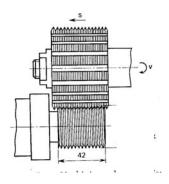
Cutting of drill flutes by form milling cutter
